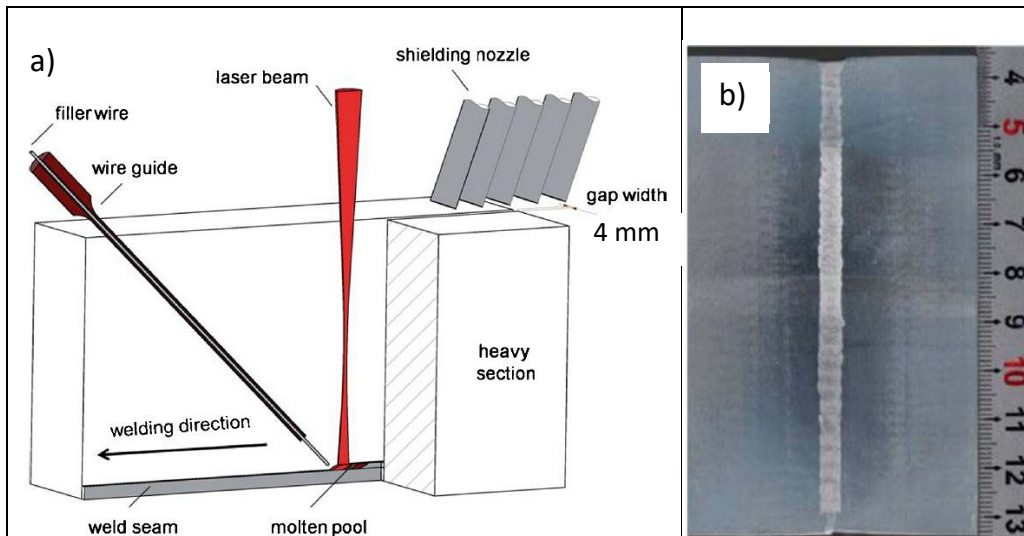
(a) Schematic presentation of multi-pass laser welding with filler wire using 4 mm narrow gap design for joining 100 mm thick type 304 austenitic stainless steel plates; (b) resultant multi-pass weld cross-section with a root pass and 42 filling passes. (Yang et al., 2019)
